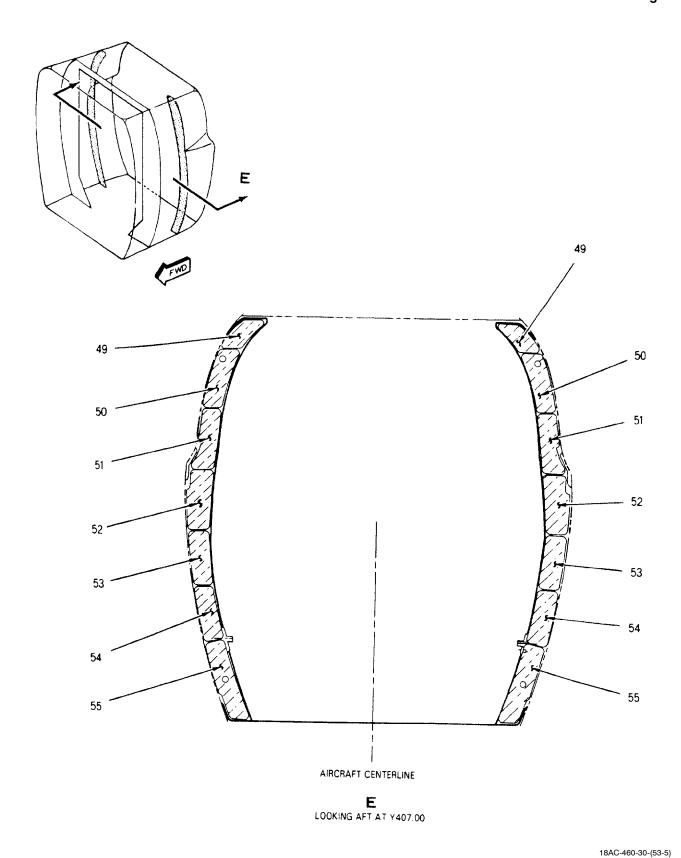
No. 2 Fuel Tank Cavity Foam Filler - 161353 THRU 161741 (Sheet 5)
